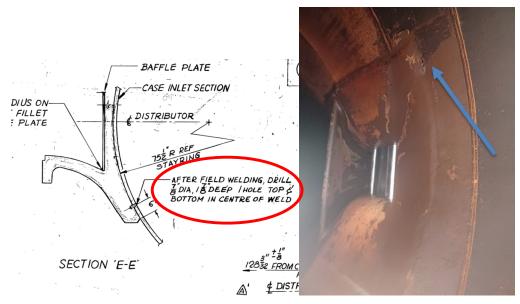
Spiral Case Drilled Holes in Weld Seam
